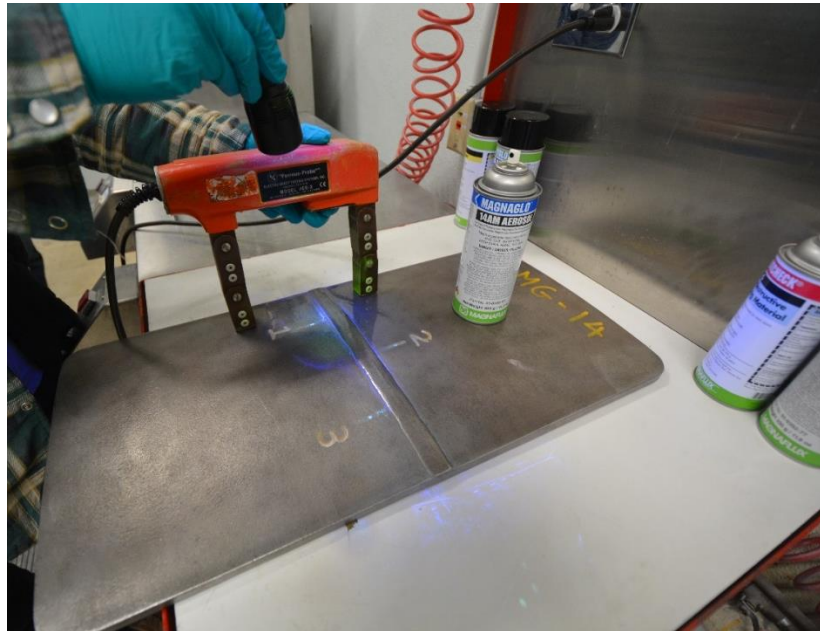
Magnetic particle inspection on defect specimen
